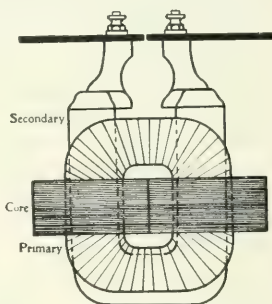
THE THOMSON WELDING PROCESS
